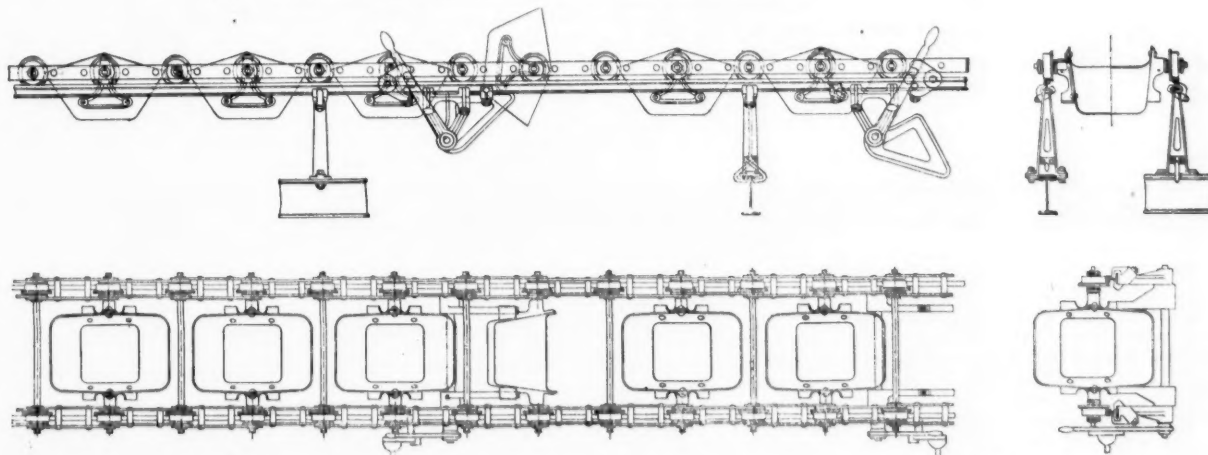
SILENT GRAVITY BUCKET CONVEYOR, SHOWING BUCKETS, CHAIN, DUMPERS, &amp;c.
